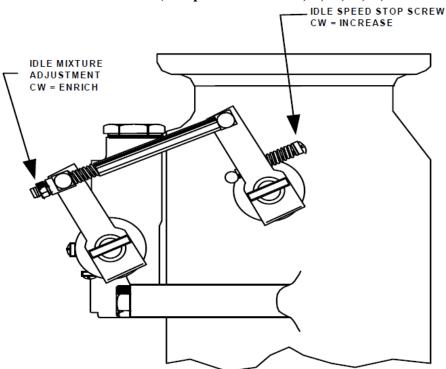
Throttle and Control Assembly Side View (except GTSIO520-D, F, H, K, L, M & N
